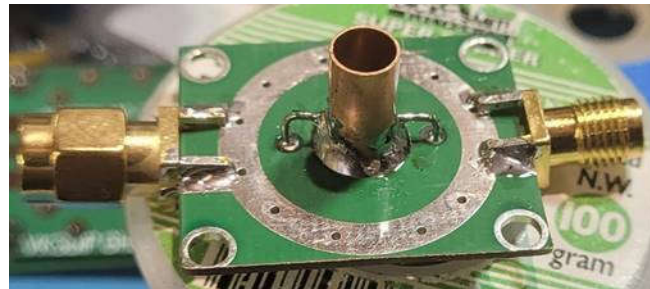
Filter no cover- Filter top(PCB Bottom)
